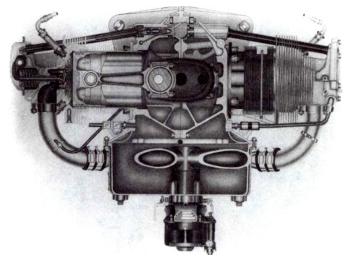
Lycoming four cylinder engine cutaway front view.
